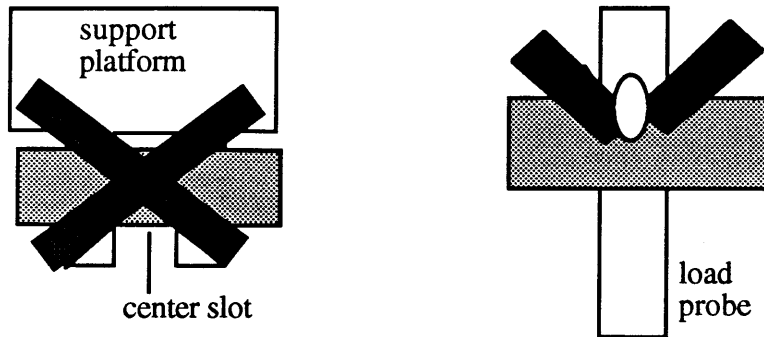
Conventional machining cuts for Micro-Flex fixtures. Light shaded area is trough cut. Dark shaded areas are milled. Center hole in load probe should be drilled first. Drawing is not to scale.
